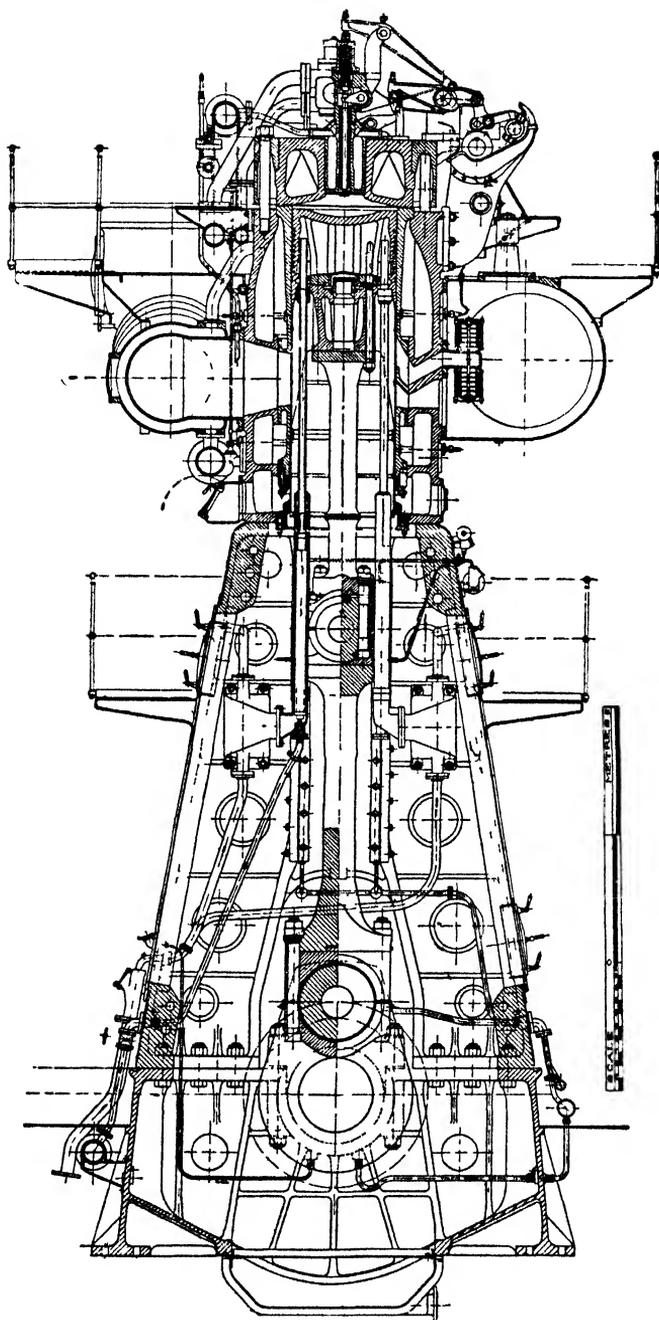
Sectional End Elevation of the 7040-b.h p. Sulzer Engine
